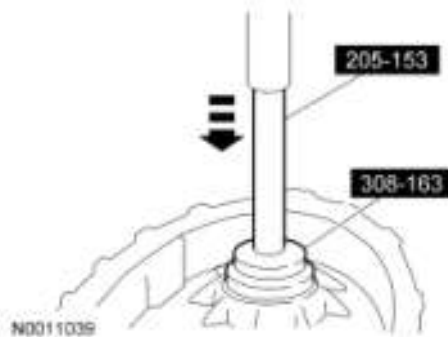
Using Special Tools To Press Front Output Shaft Support Bearing Into Case
